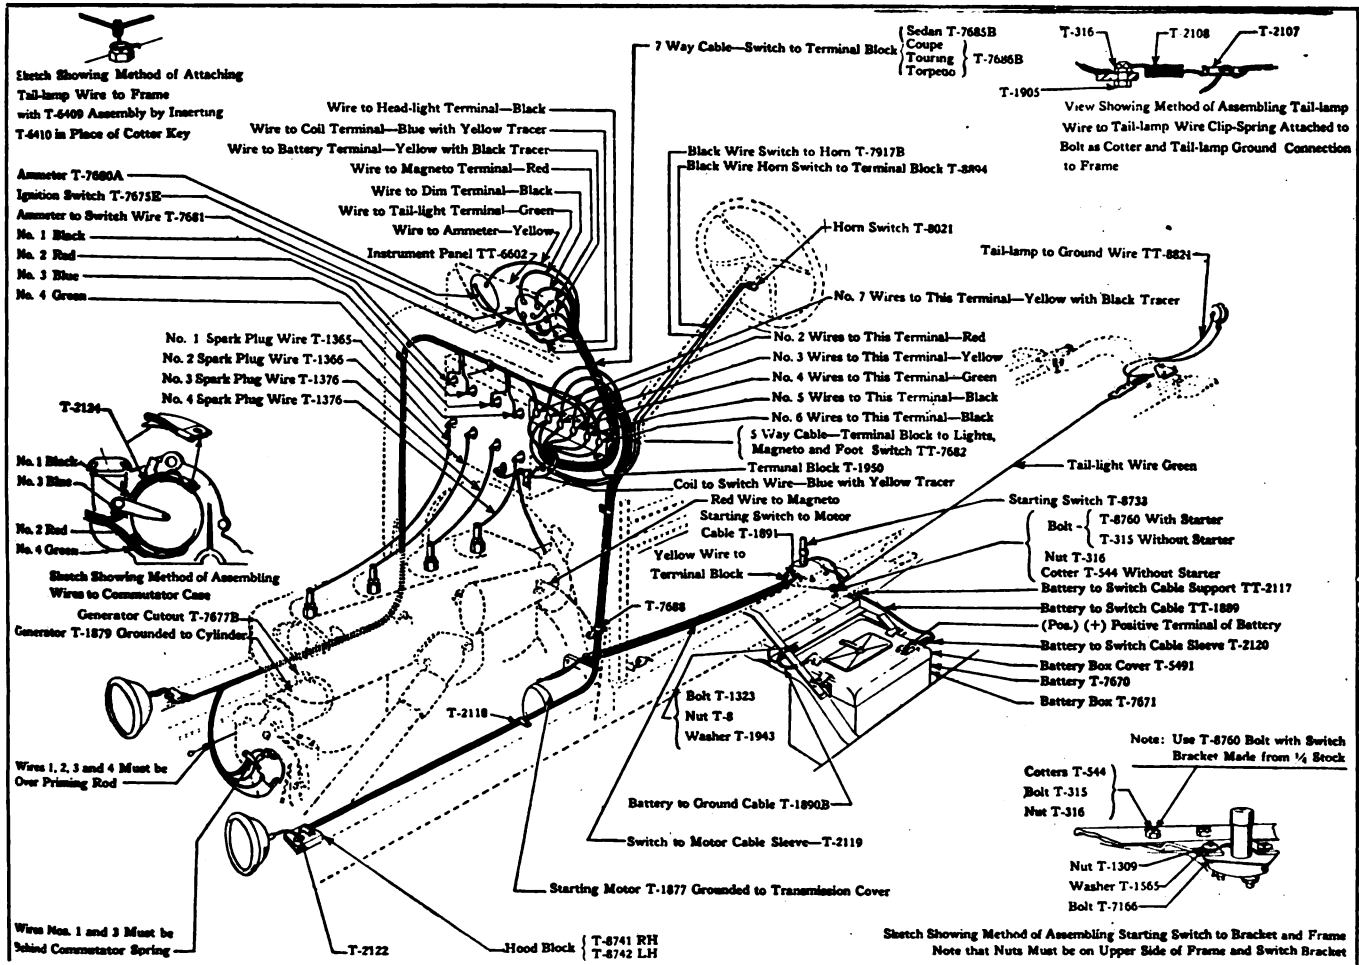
SHOWING WIRING ARRANGEMENT FOR THE FORD TRUCK EQUIPPED WITH STARTER
